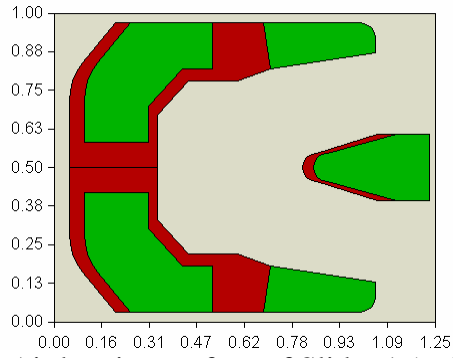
Air bearing surface of Slider 1 (unit: mm).
